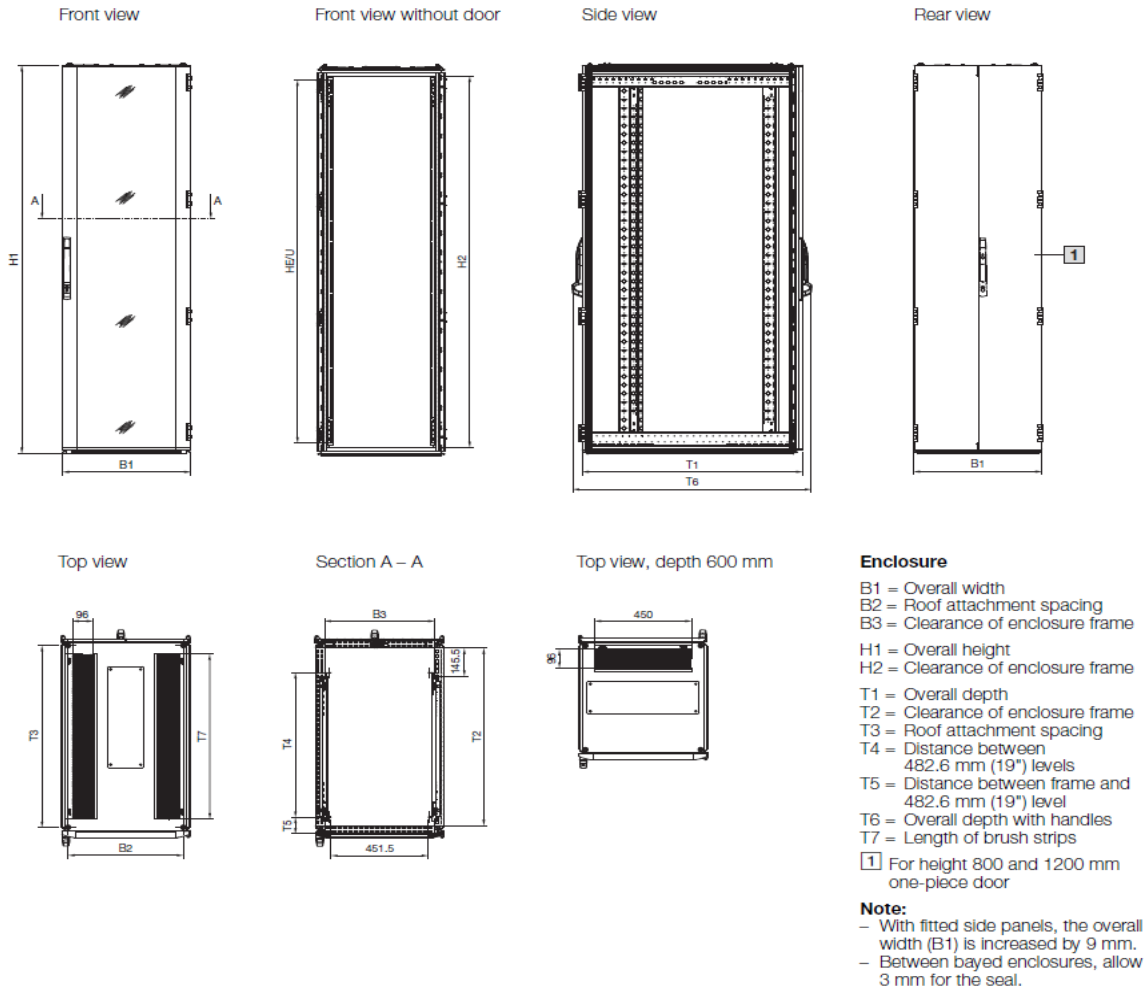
3; RACK Platform NICA - MPD, Dimensions and construction
